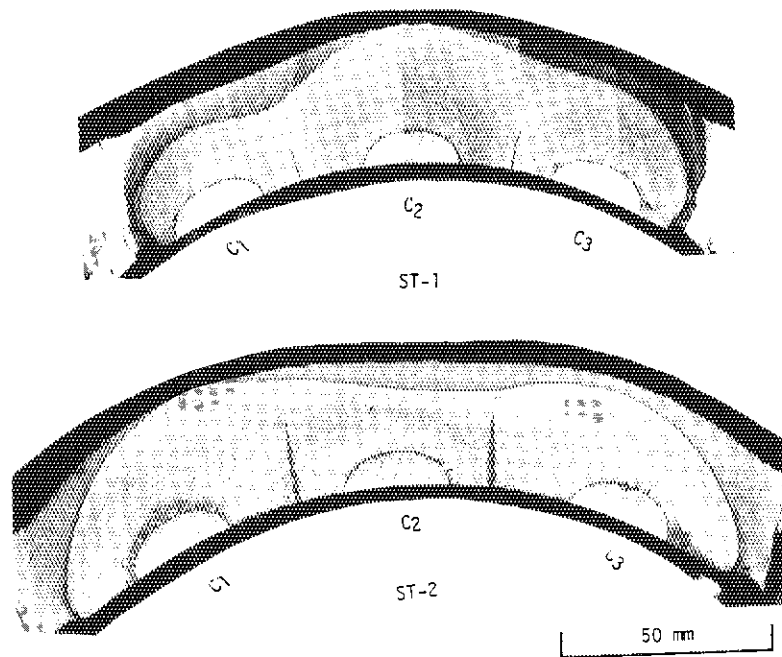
Fracture surface of straight pipes;ST-1 and ST-2
